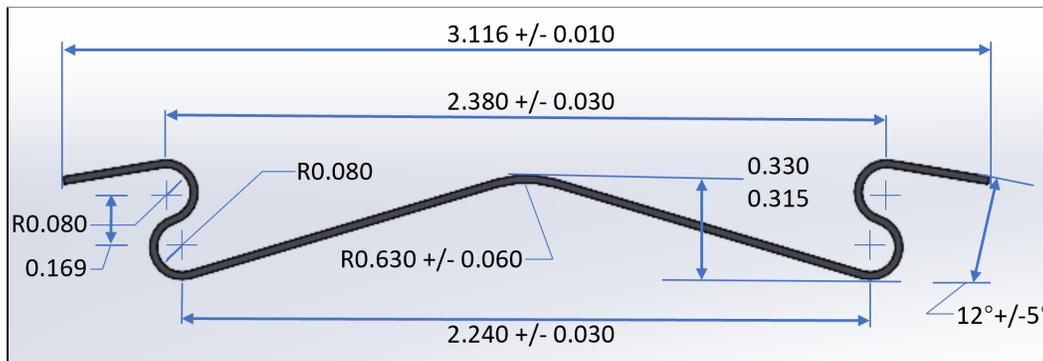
SolidWorks model of 9 gauge flat spring with dimensions
